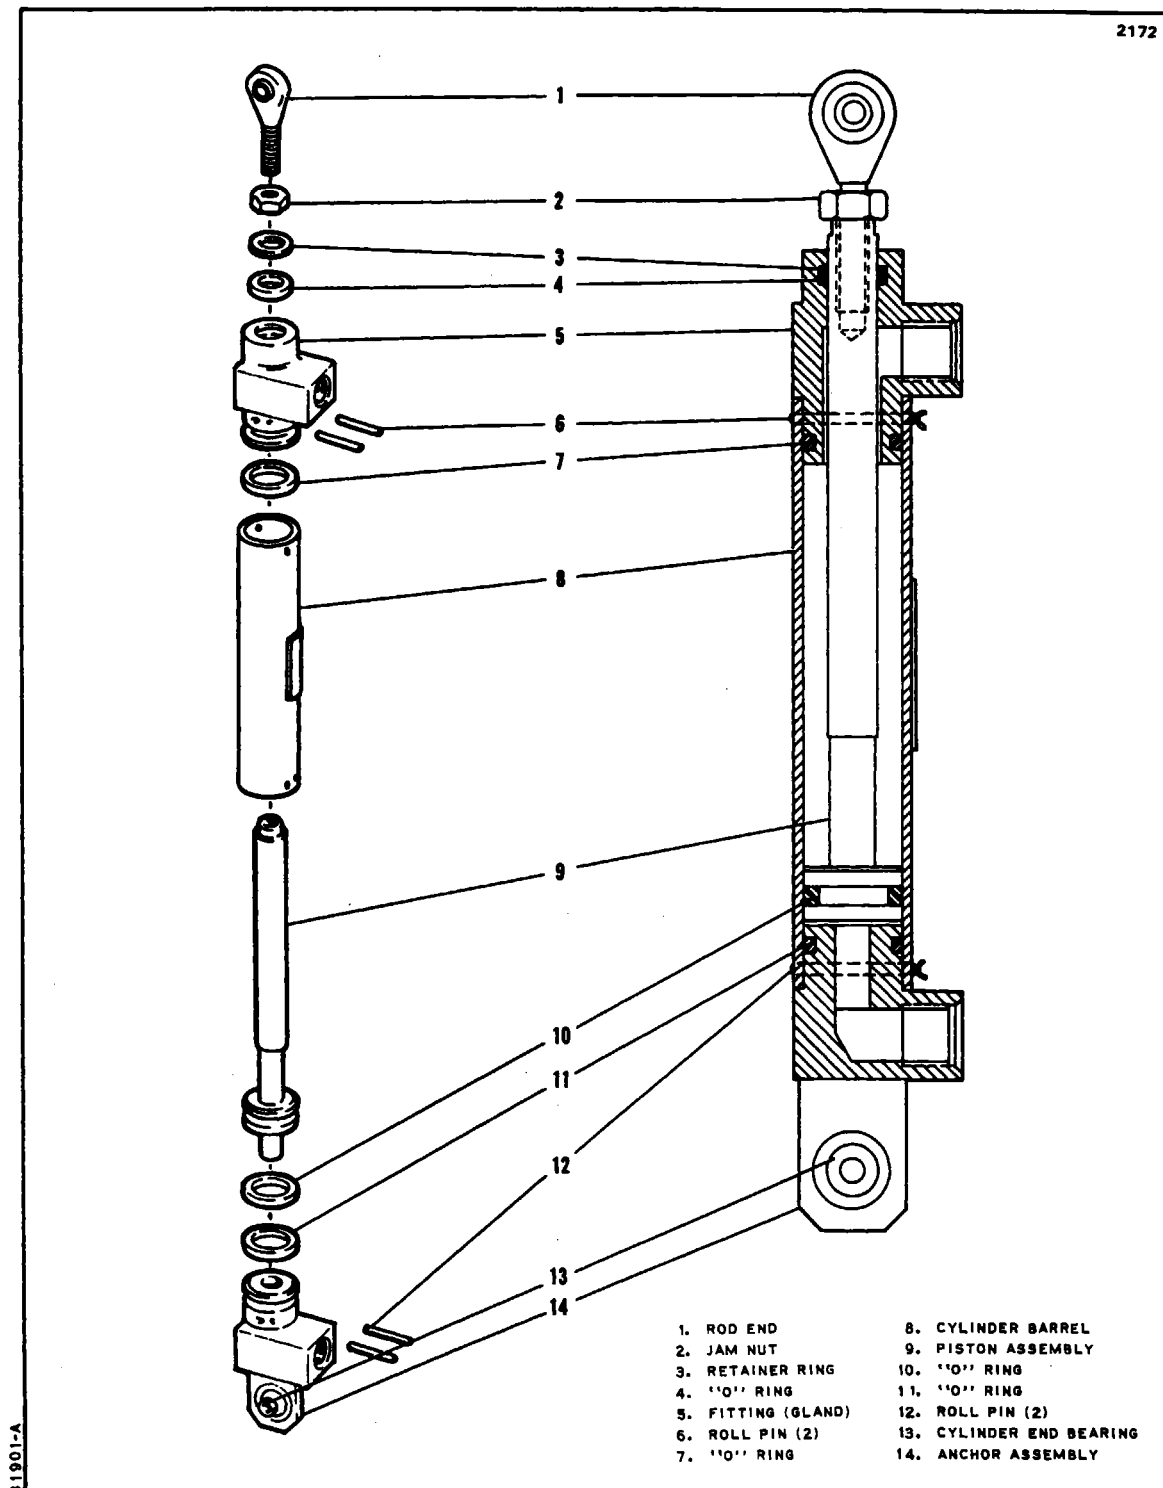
Main Gear Door Actuating Cylinder (451 845)
